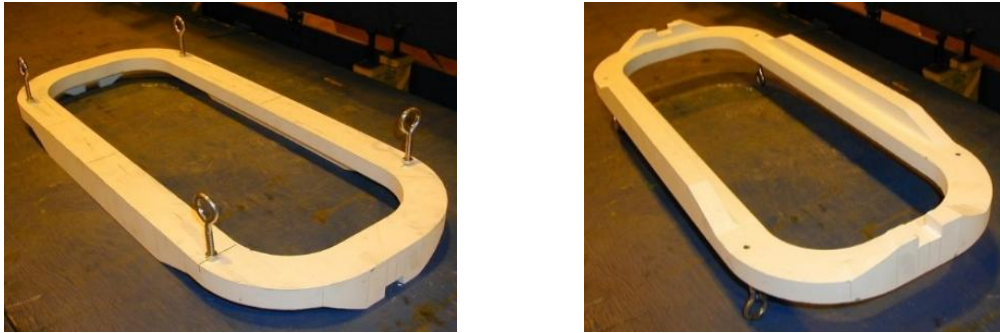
Skim dam designs. Top: open center of rolling face and short side, Bottom: open first quarter of rolling face.
